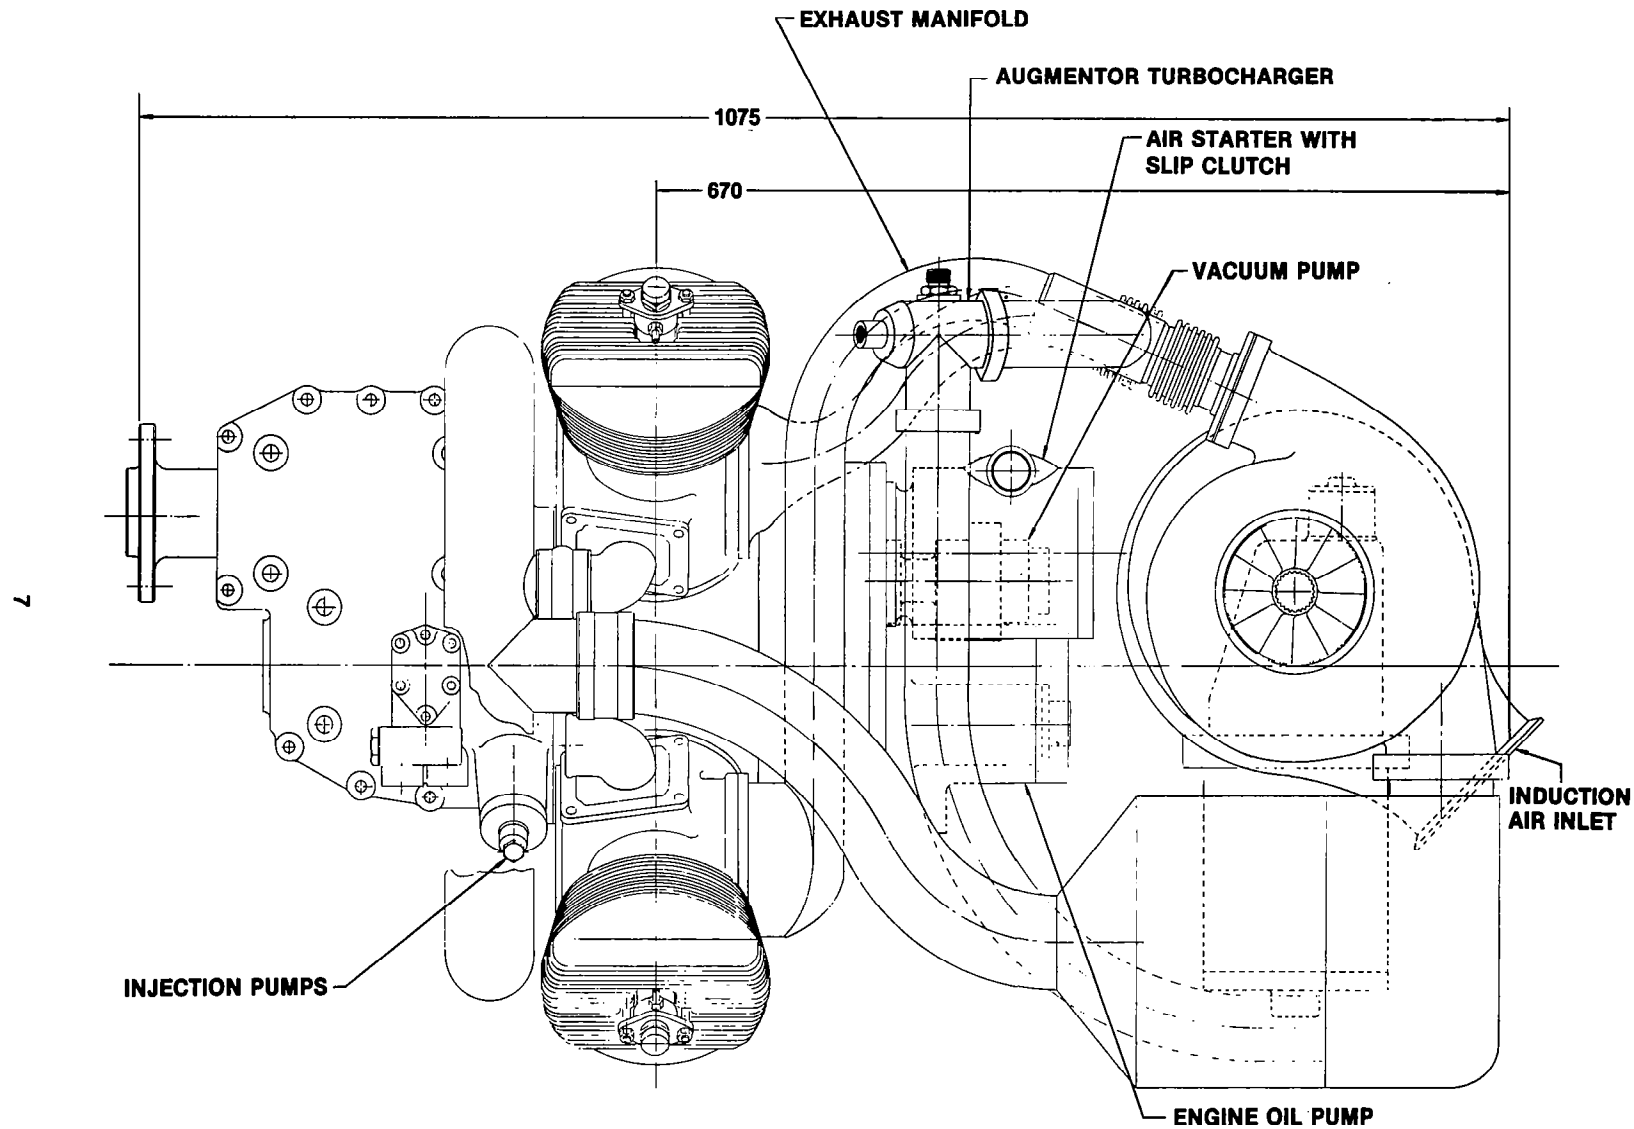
186 kW AIRCRAFT DIESEL SIDE VIEW
